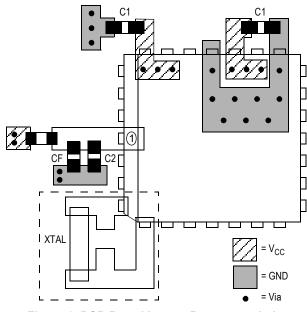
PCB Board Layout Recommendation for the PLCC28 Package
